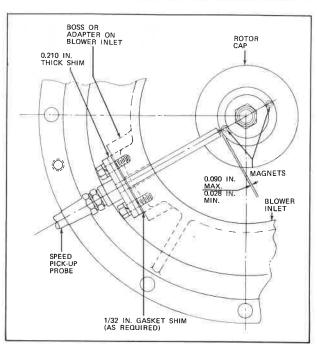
AIR INLET VIEW OF TURBOCHARGER.
